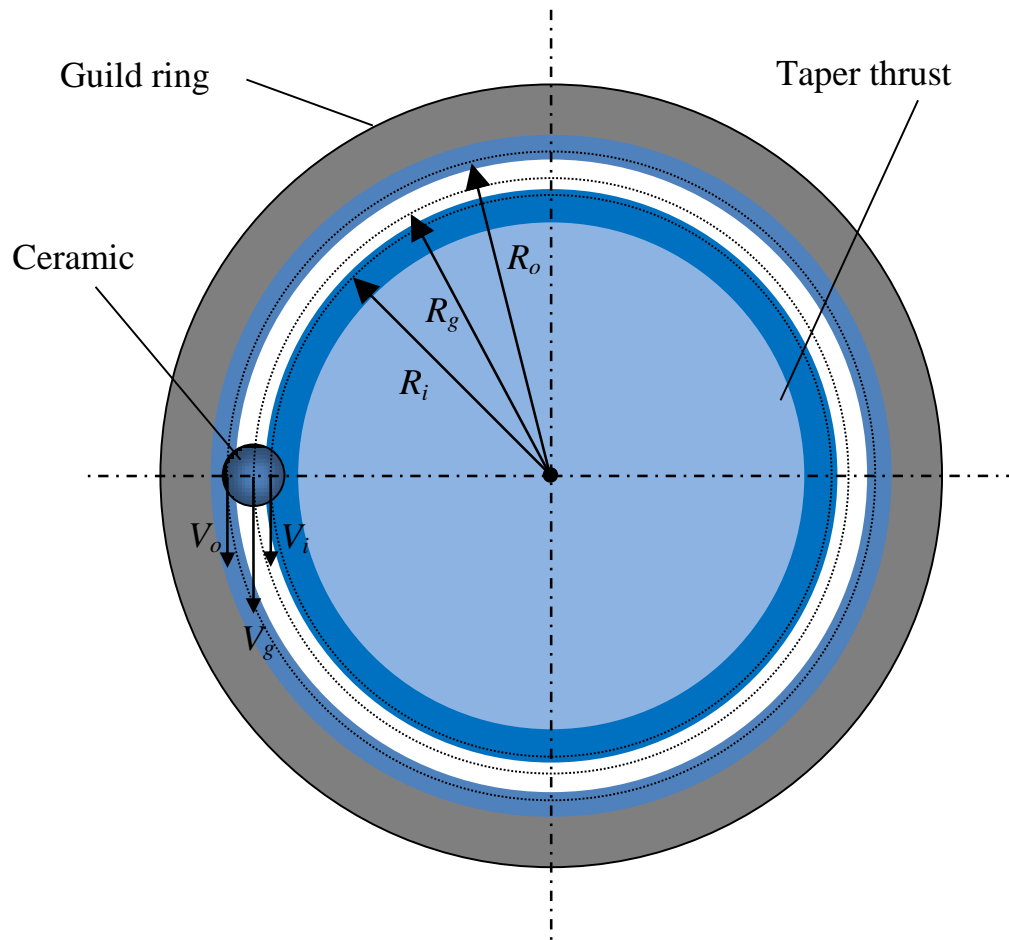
Top view of the concentric V-groove grinding mechanism
